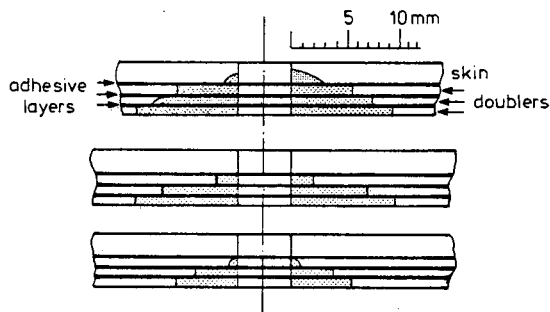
Fatigue crack nuclei in the critical section of the joint shown in Fig. 19 (Ref. 9)
